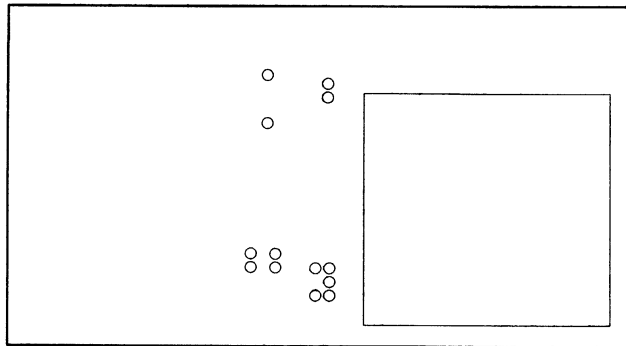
TRF1400 Receiver Test Circuit, Board Solder Mask — Bottom Side
